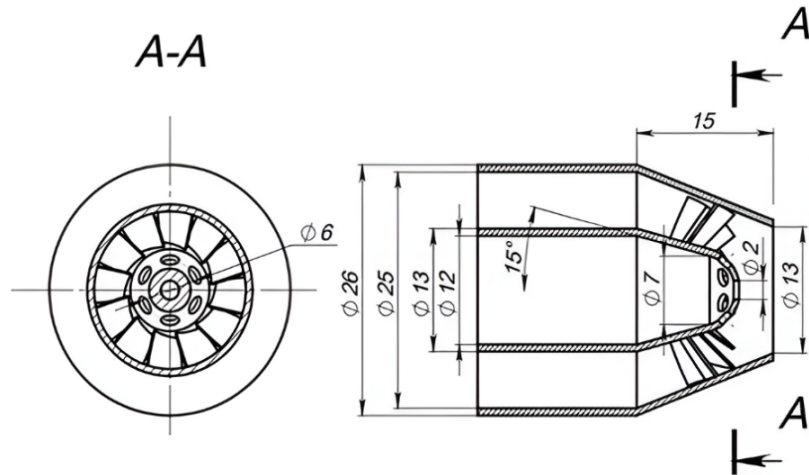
Drawing of the working section of the experimental stand, all dimensions are in millimeters.
